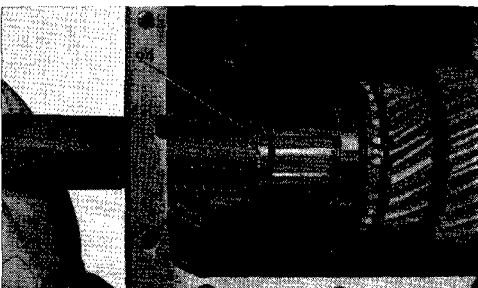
Using Churchill tool S.145 to install the mainshaft circlip
